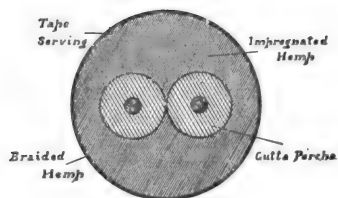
Section of Gutta-percha Cable with Pair of Twisted Wires.
